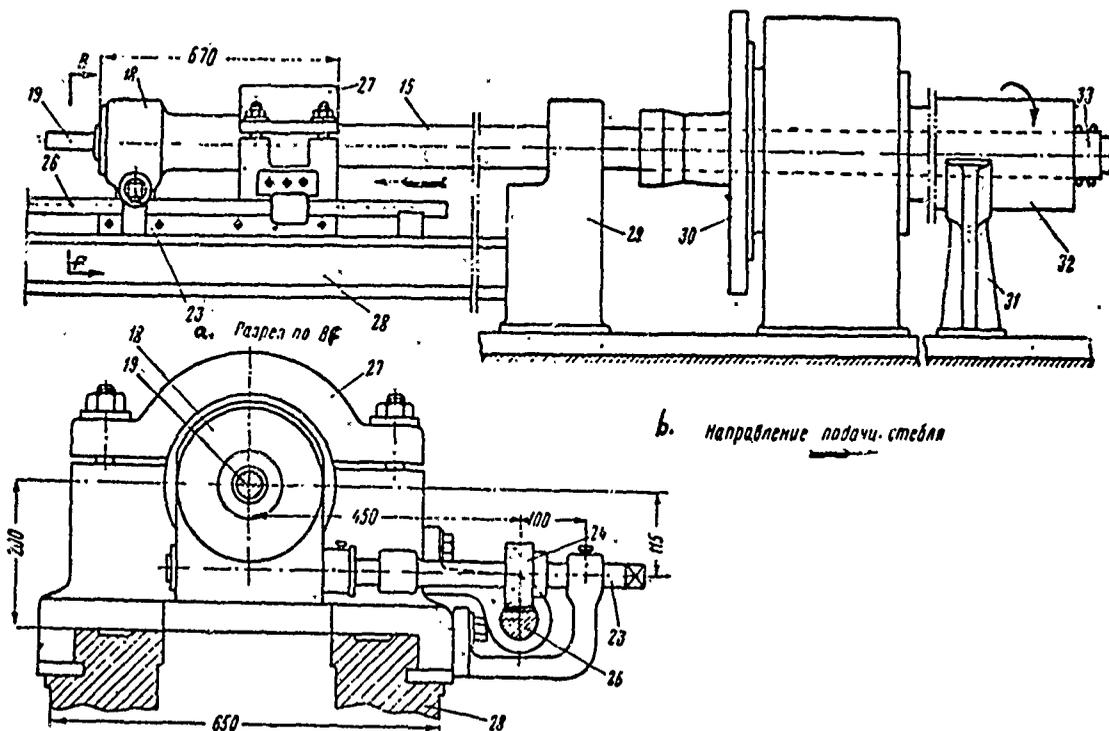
Schematic of tube installation on the machine for boring a conic bore in it with the attachment shown in Fig. 100
